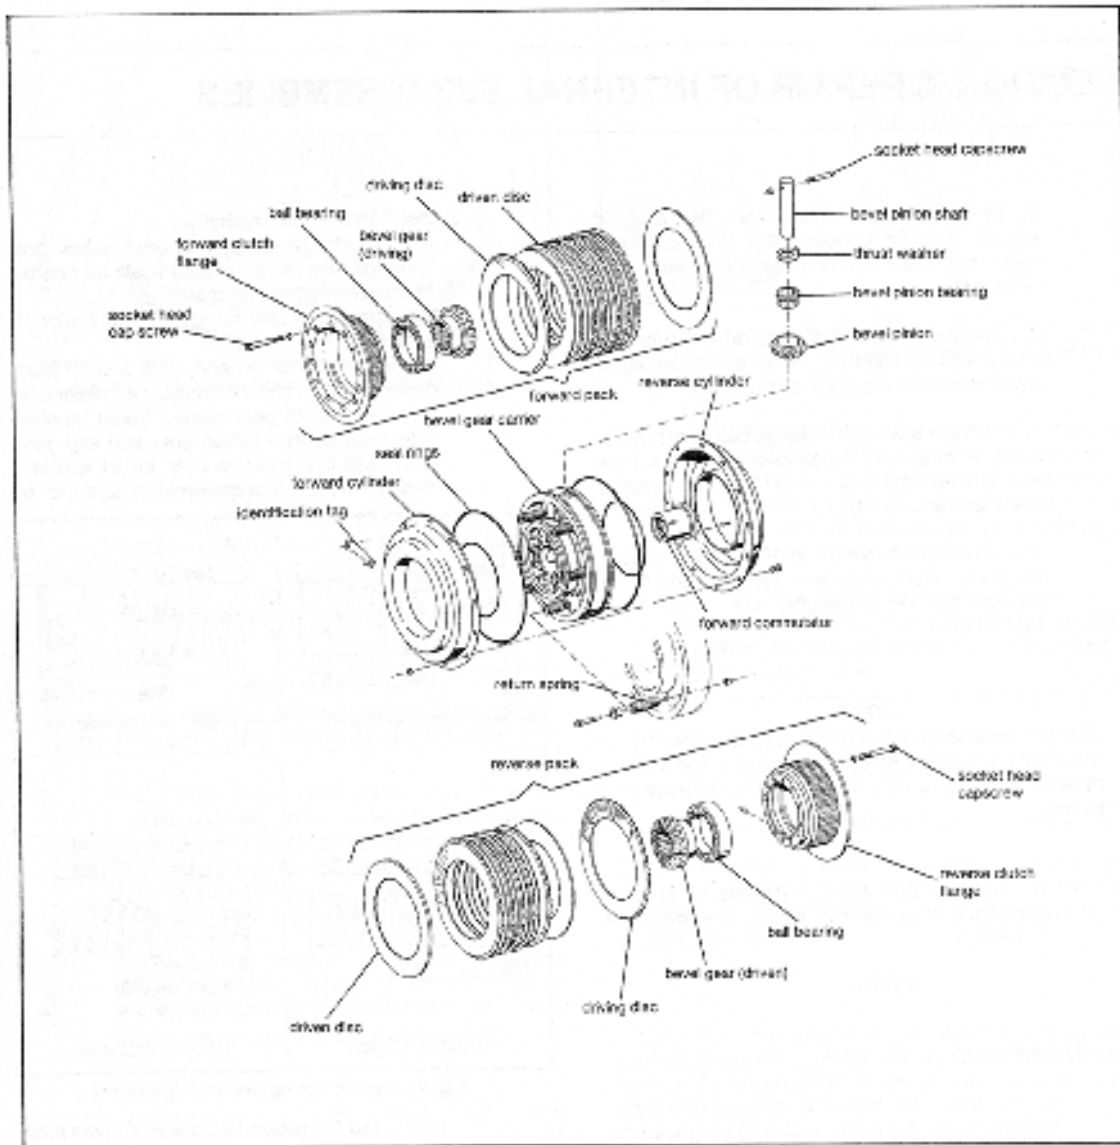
Clutch and Gear Carrier Assembly ('HY' clutch shown)
